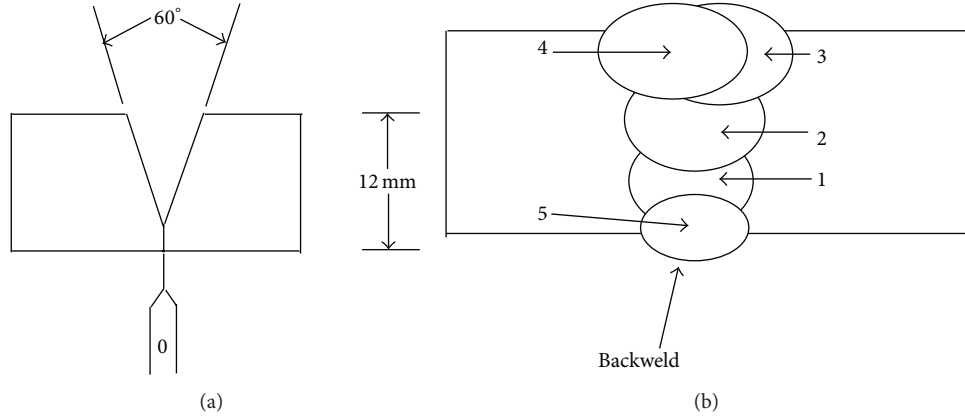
Welding details of AA6061 Al alloy plates: (a) joint configuration and (b) welding sequence, 1 → 2 → 3 → 4 → 5 (backweld).
